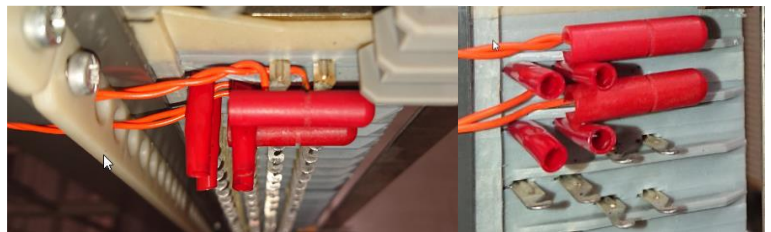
1: Solder lugs with orange insulating sleeve
